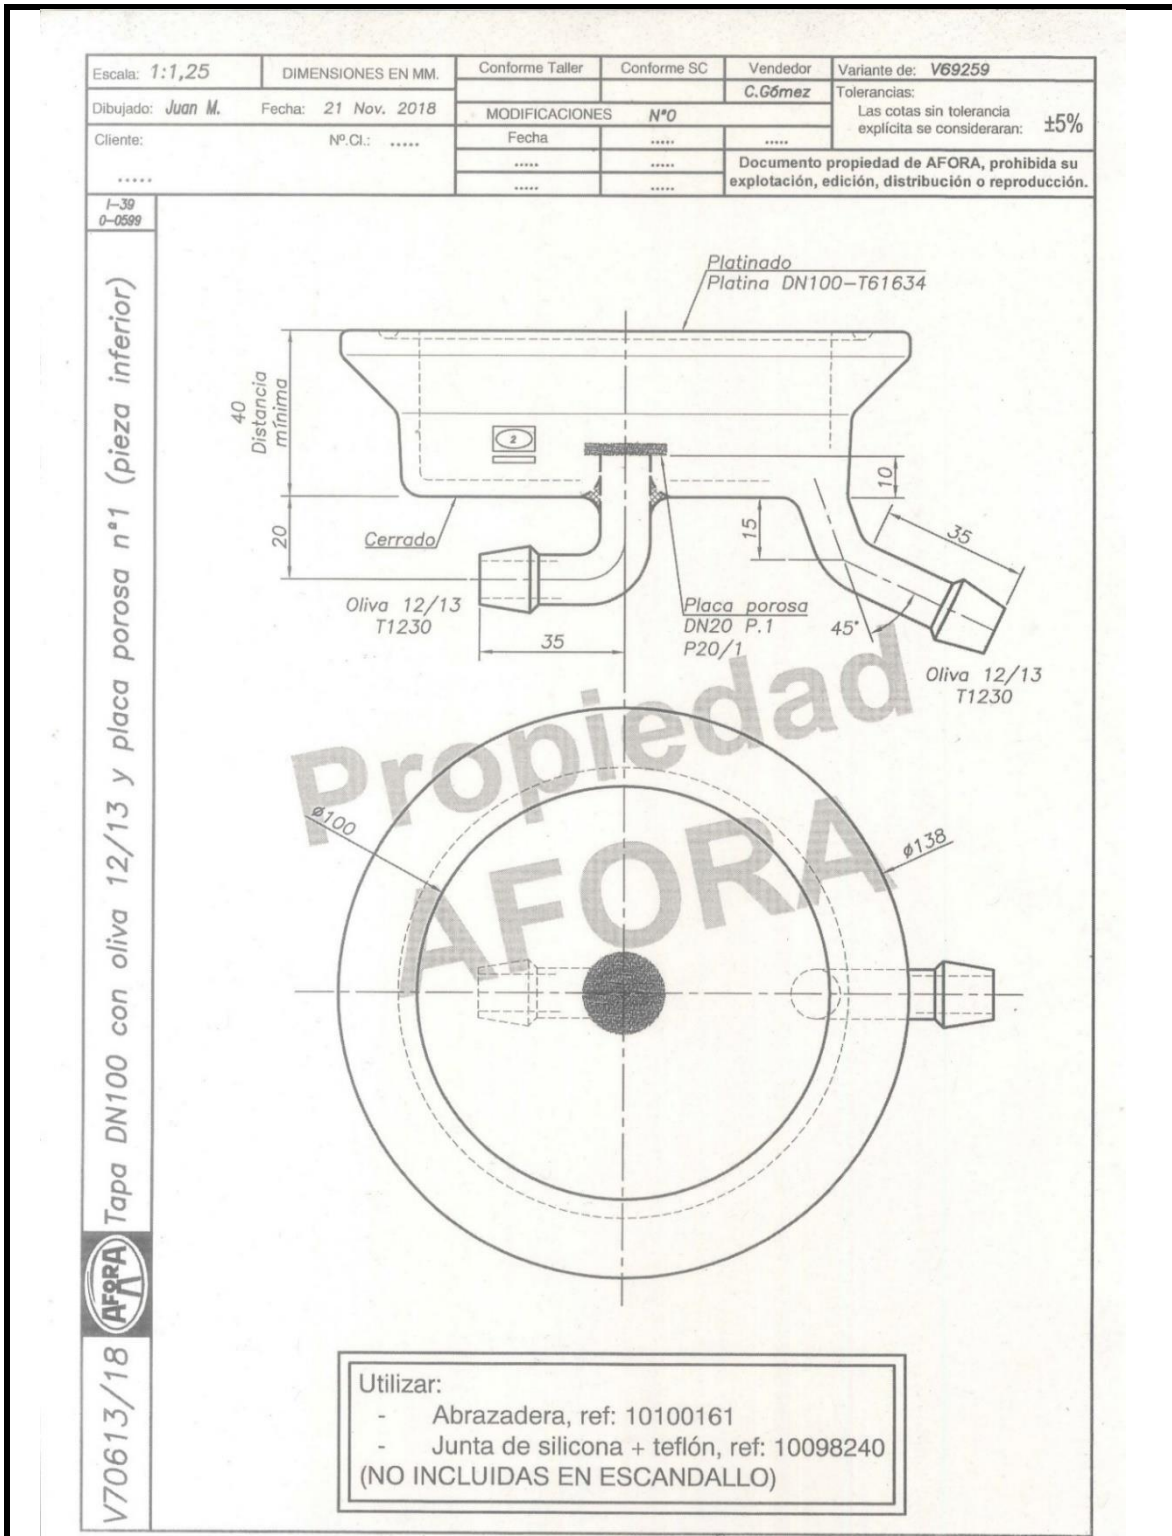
GLR dimensions of the bottom part (the gas diffusion).
